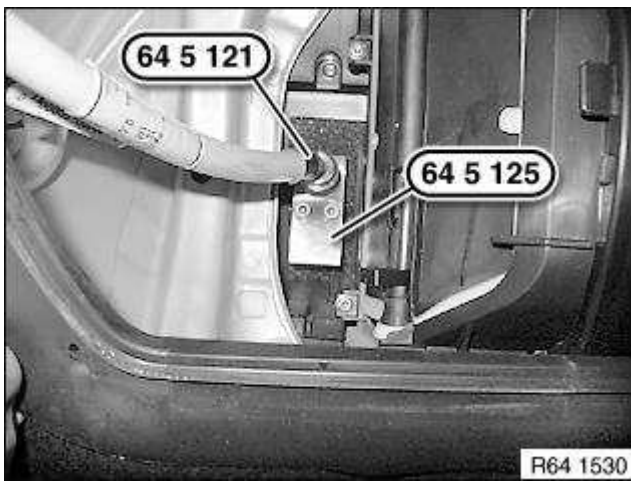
Identifying Special Tool 64 5 121 & 64 5 125
